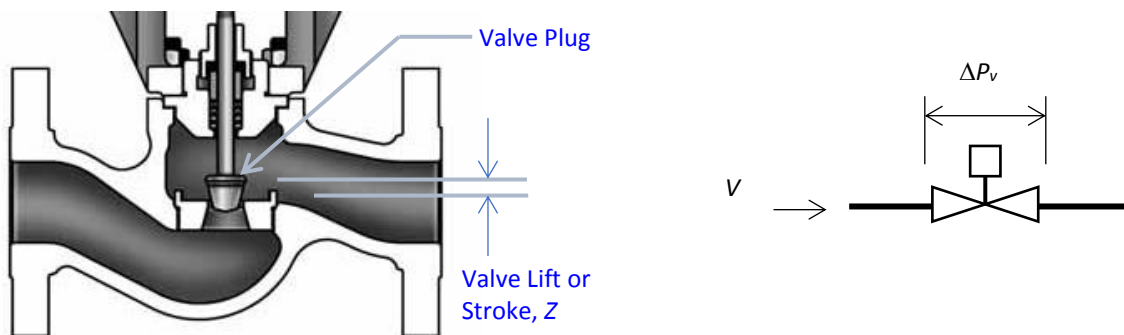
The valve plug position, quantified by the lift or stroke (left), and typical symbol used to denote a control valve (right)
